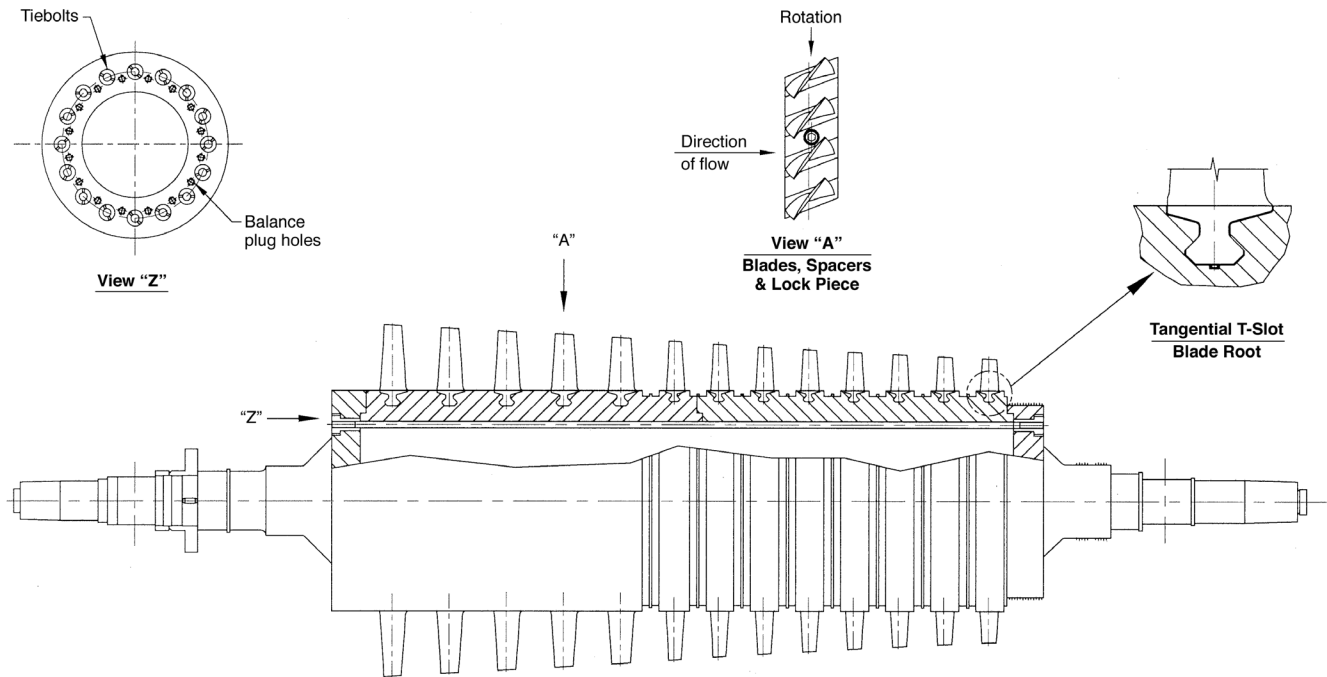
Axial Compressor Rotor Construction: Drum Rotor with Tie Bolts
